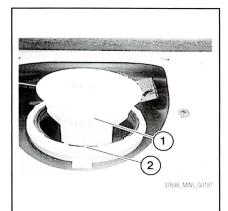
When installing fuel filter, make sure lug engages in recess on tank
